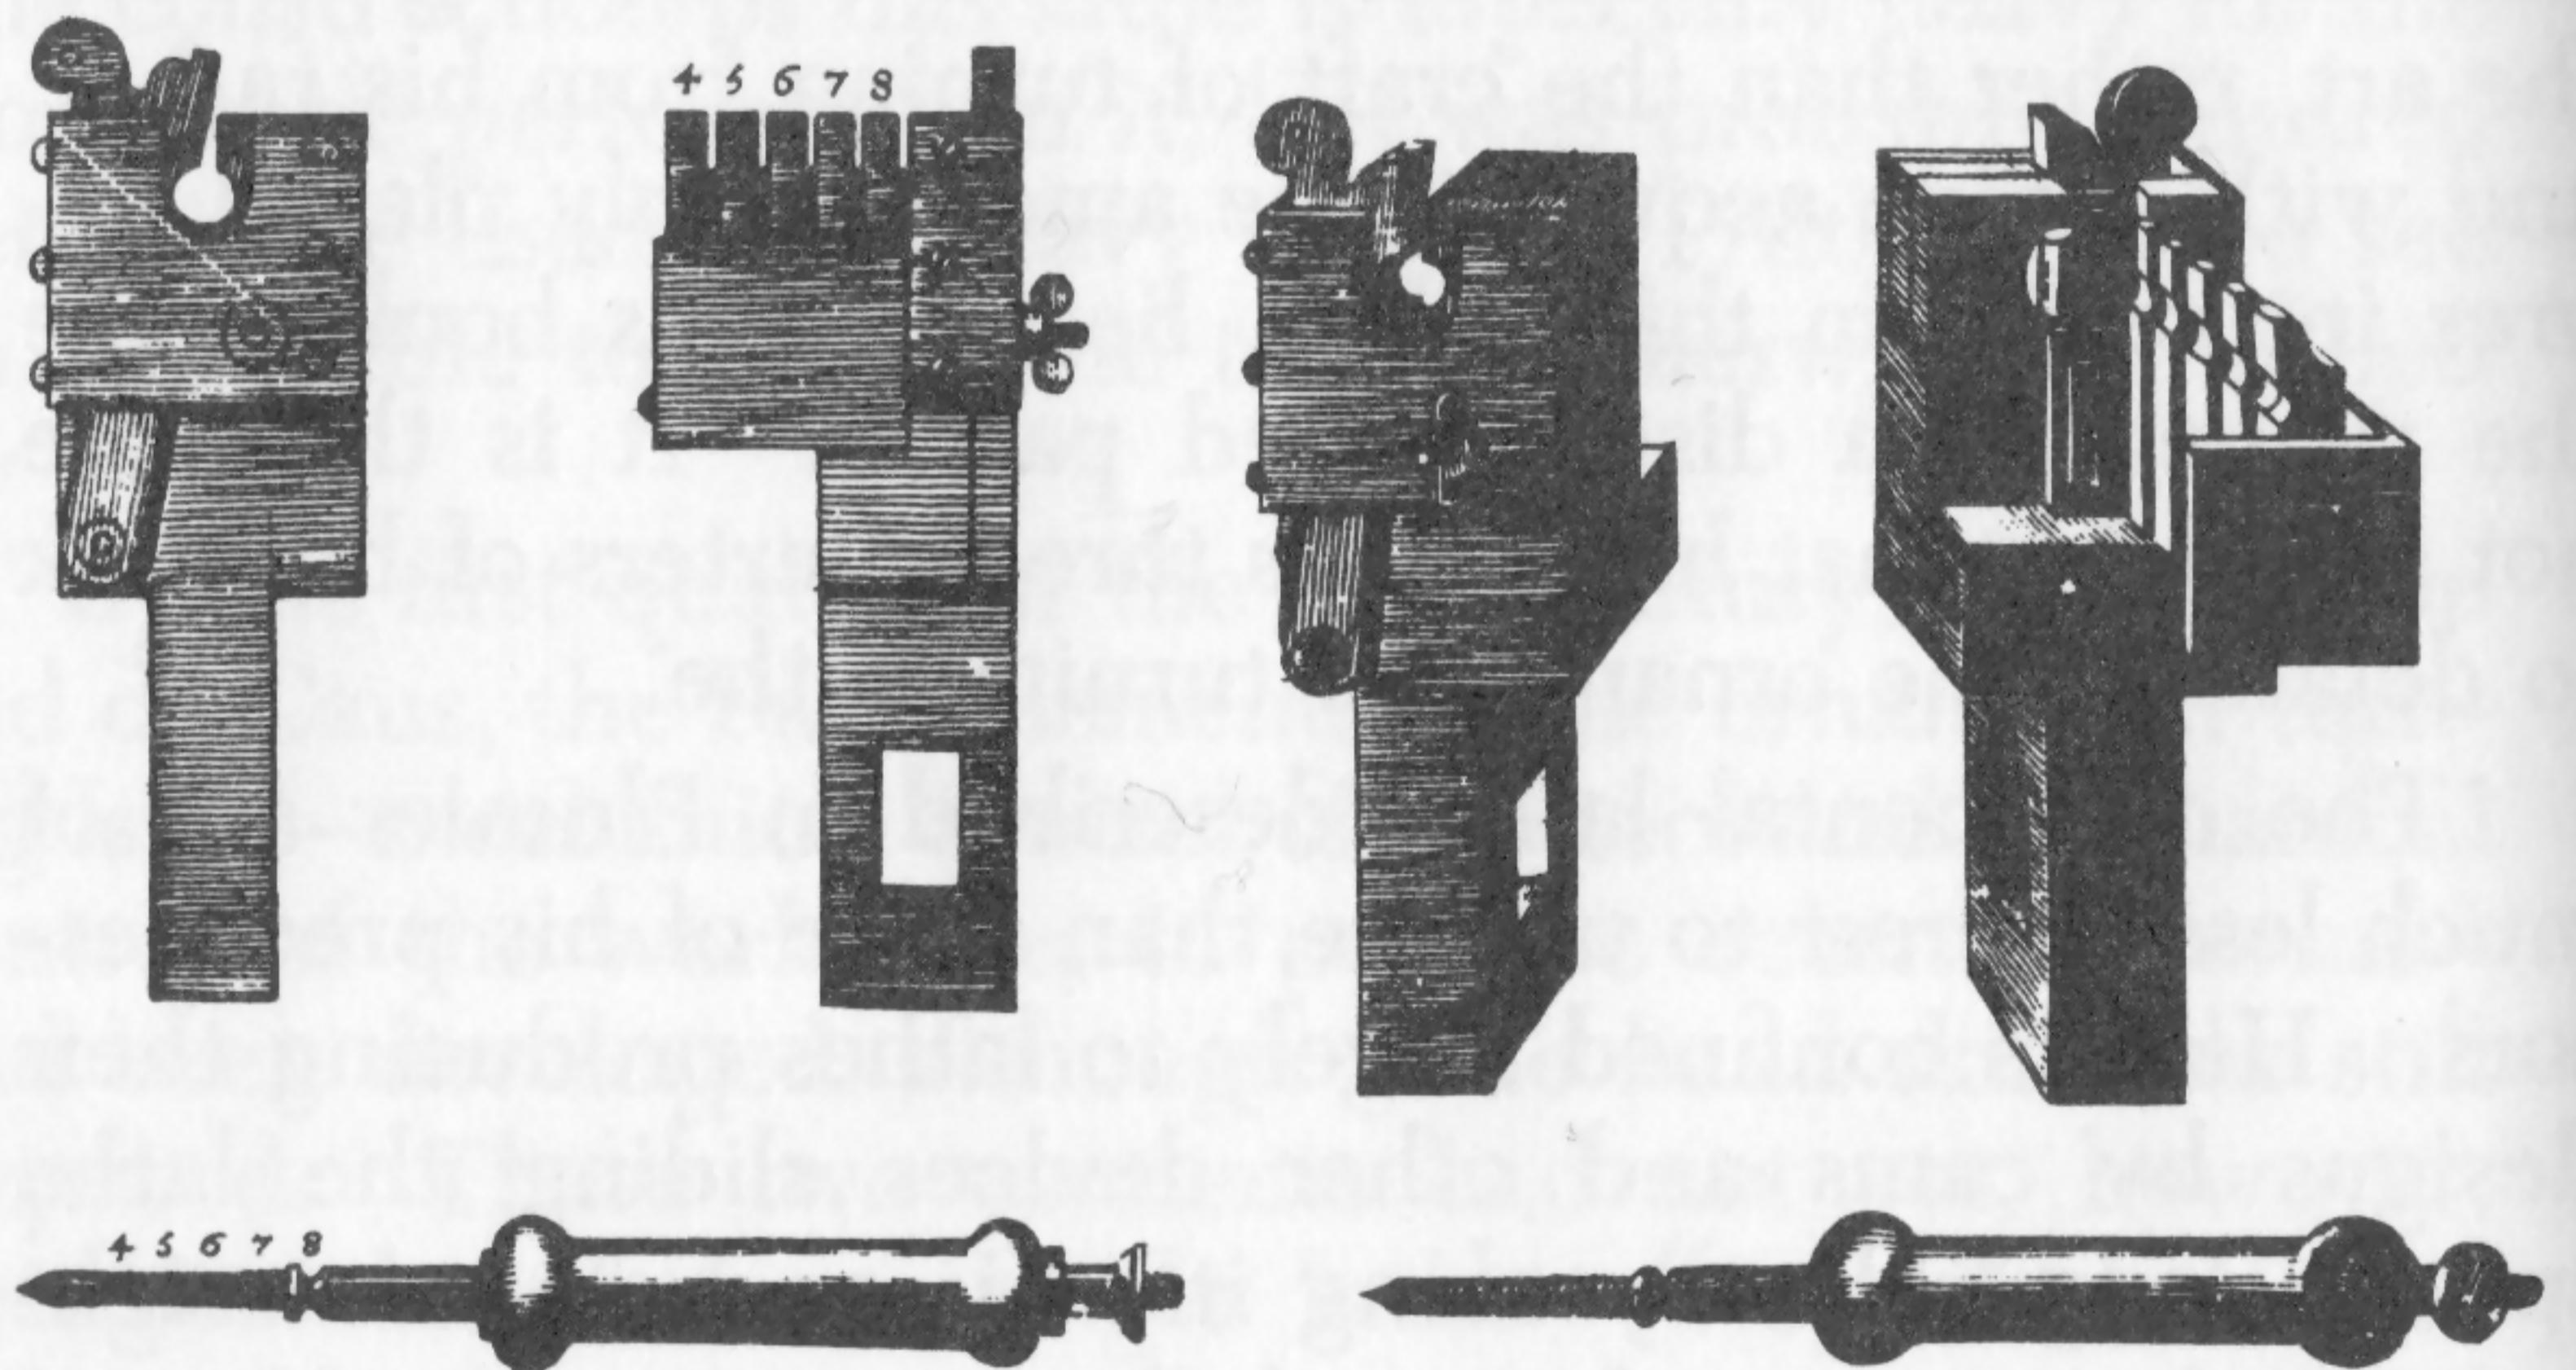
SCREW CUTTING ON THE SLIDING SPINDLE, 1701.
